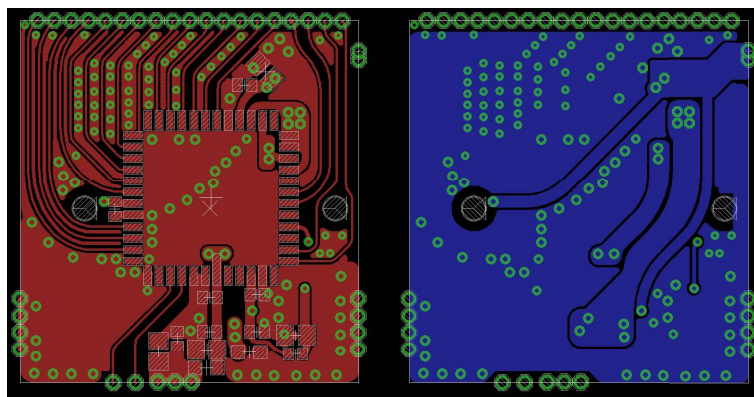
Drawing of the CMOS image sensor: component side (left) and drawing the other side (right)
